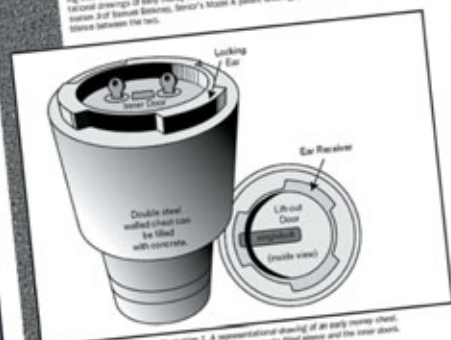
A cross-sectional drawing of an early money chest, showing the internal mechanism and the location of the dog pin.
